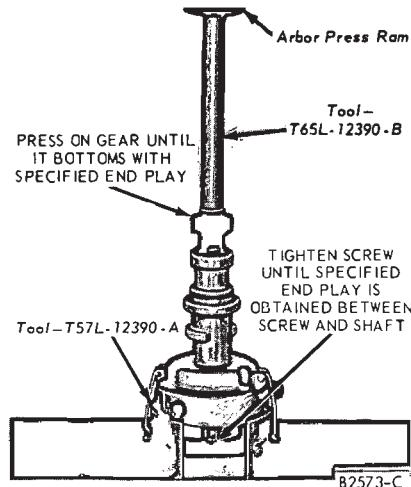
Installing New Shaft and Gear—6-Cylinder Engine
